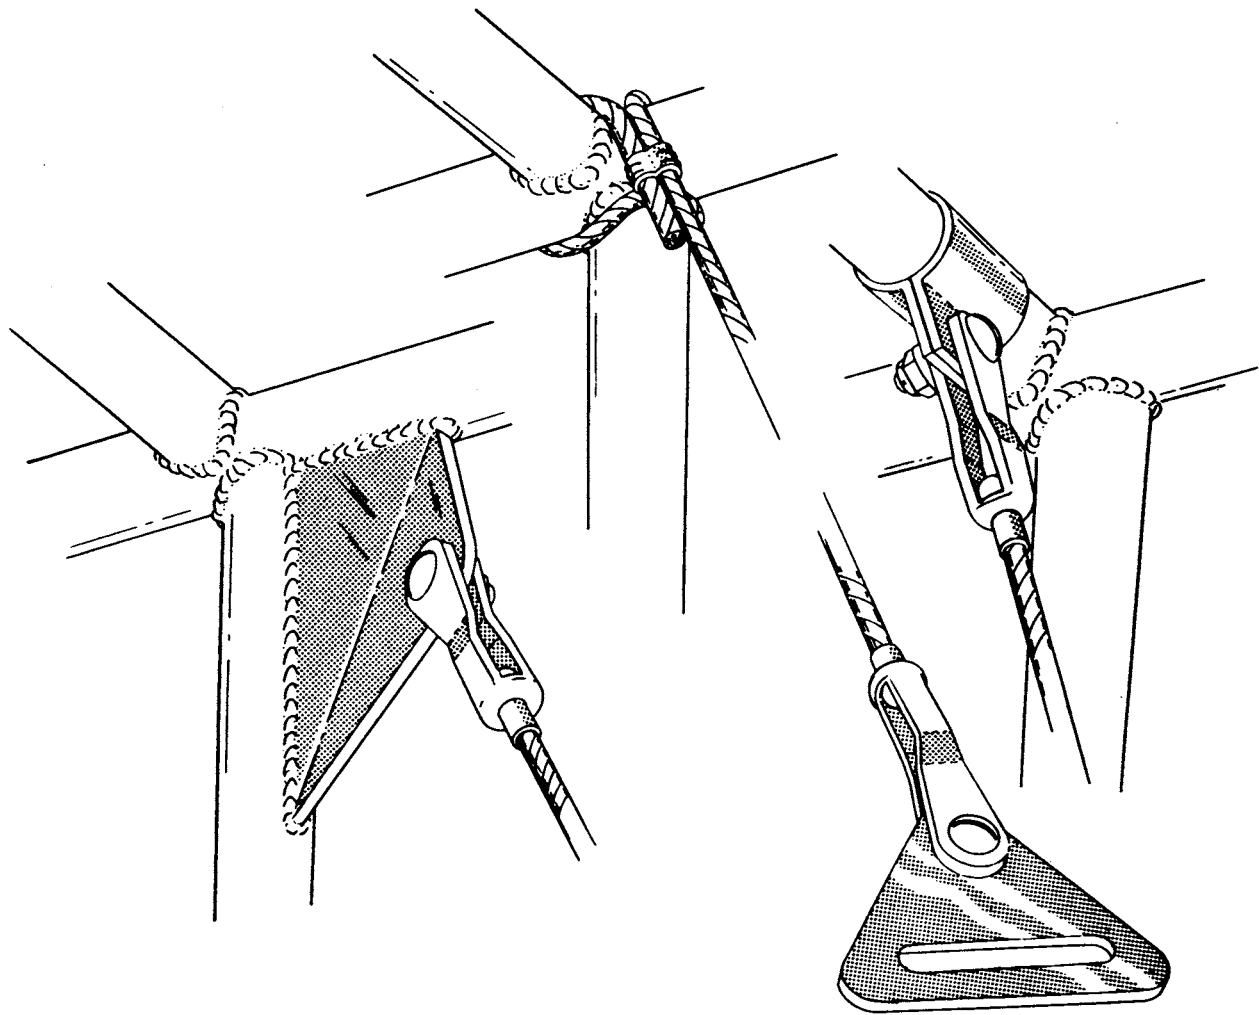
Typical attachment to tubular members (adequate chafing protection for tube should be provided. Detail omitted for clarity.)
